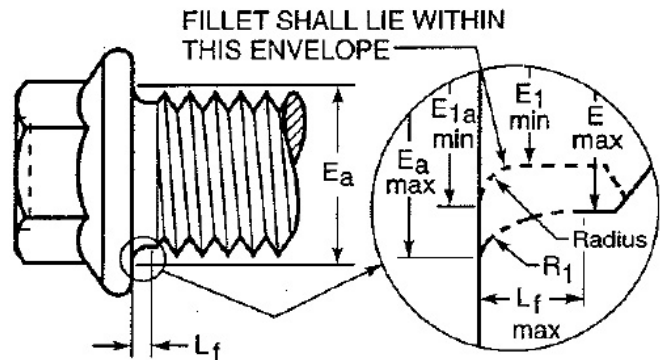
Underhead Fillet for Short Screws Threaded Full Length
